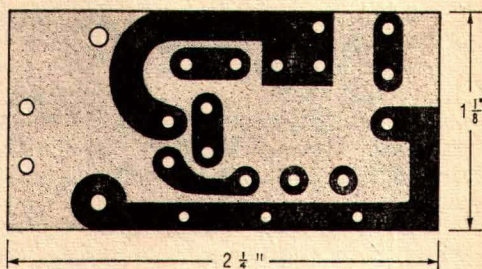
Exact size printed card layout. Trace lines on copper faced side for etching circuit.
